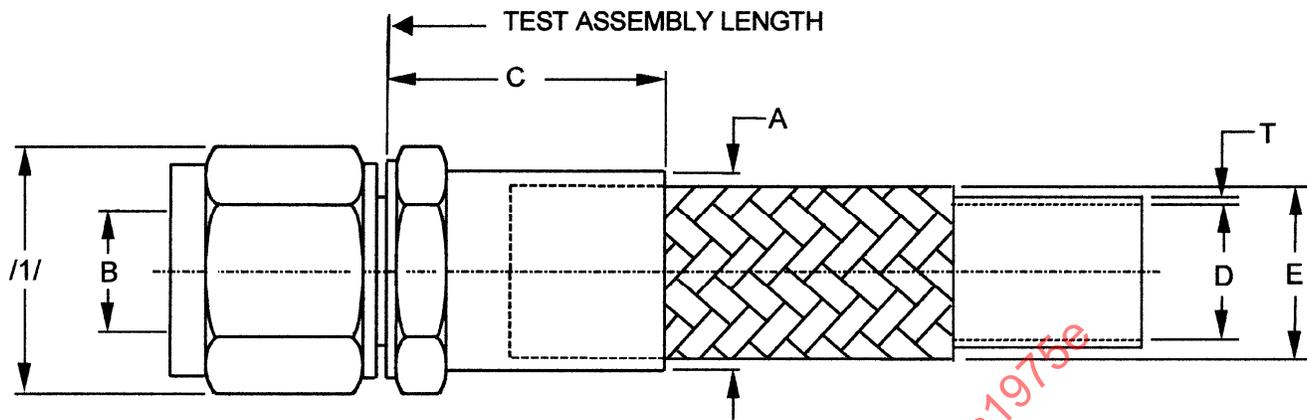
HOSE AND FITTING DIMENSIONS
